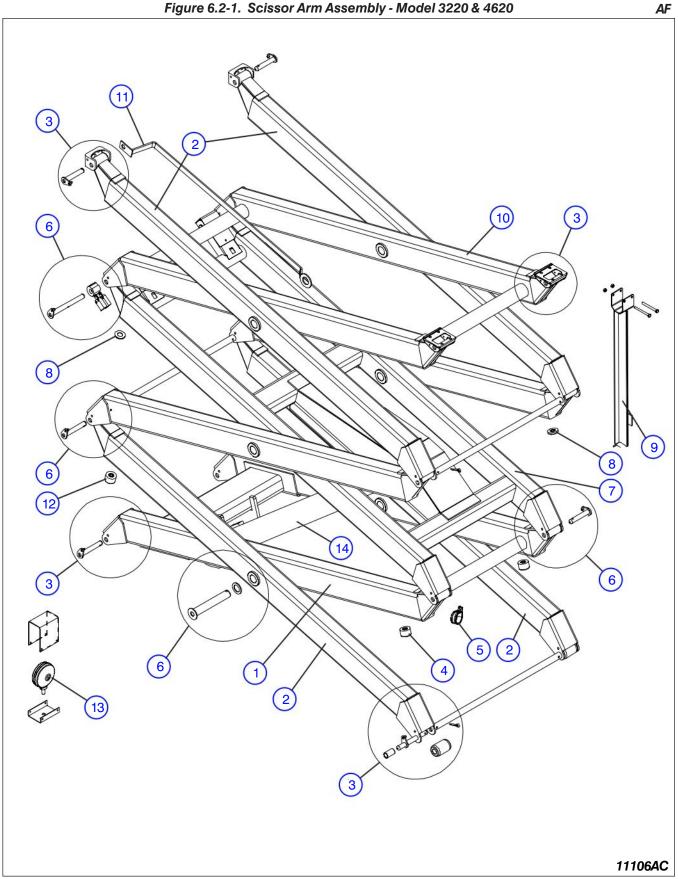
Scissor Arm Assembly - Model 3220 & 4620
